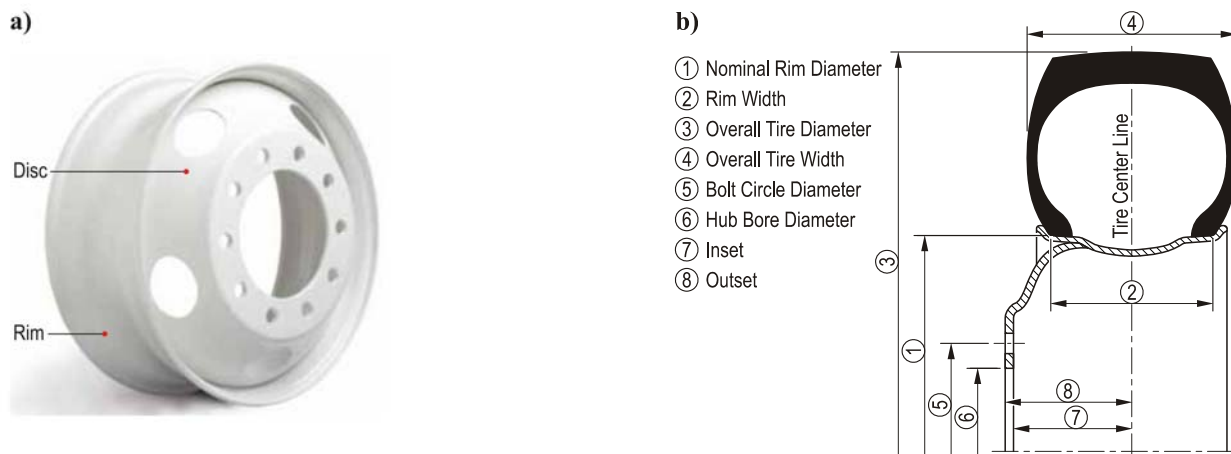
The FDOT truck tractor wheel: a) front view of the wheel, b) cross-sections of the wheel and tire – dimensions are provided in Table 4.28 and Table 4.29
